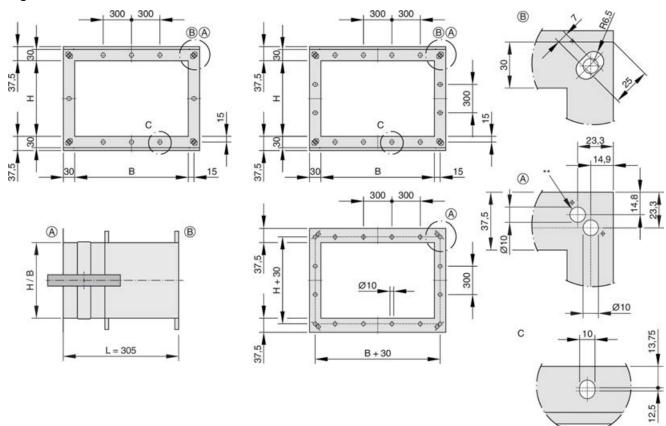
Flange holes L = 305 mm - uneven and even number of holes
